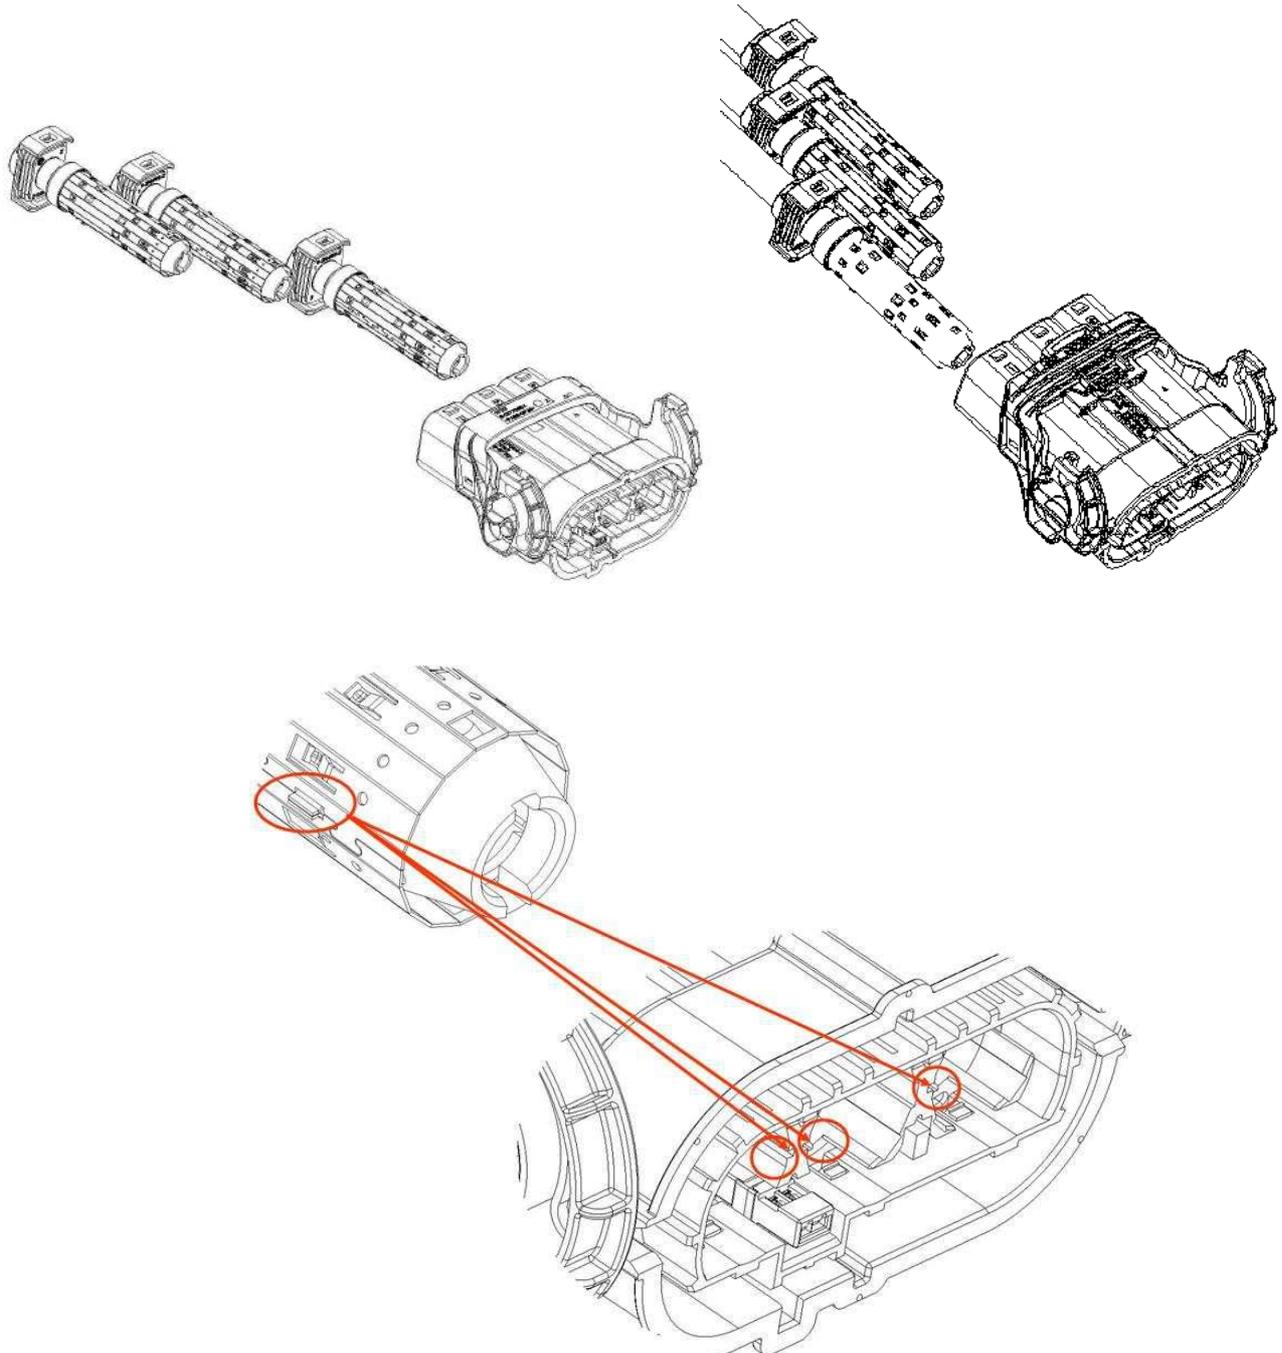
Assembly 3 pos. connector/Montage 3-pol. Stecker
